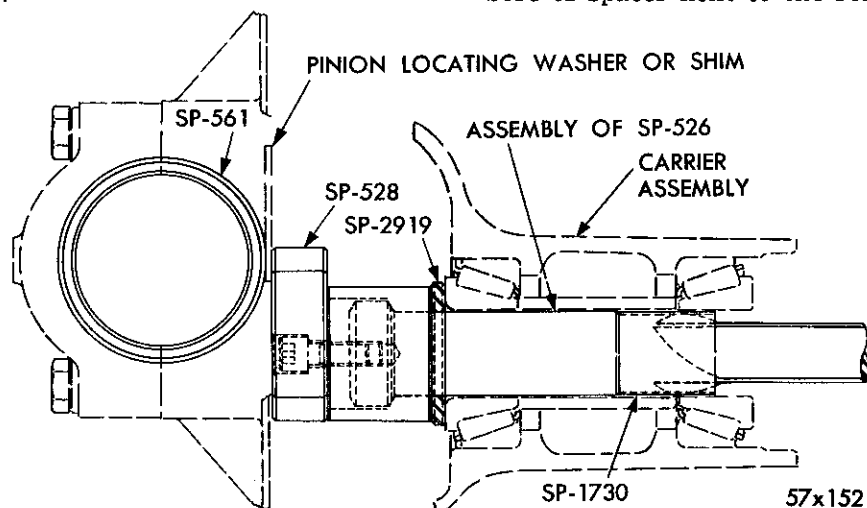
Setting Pinion Bearing Pre-Load (Newport only)
